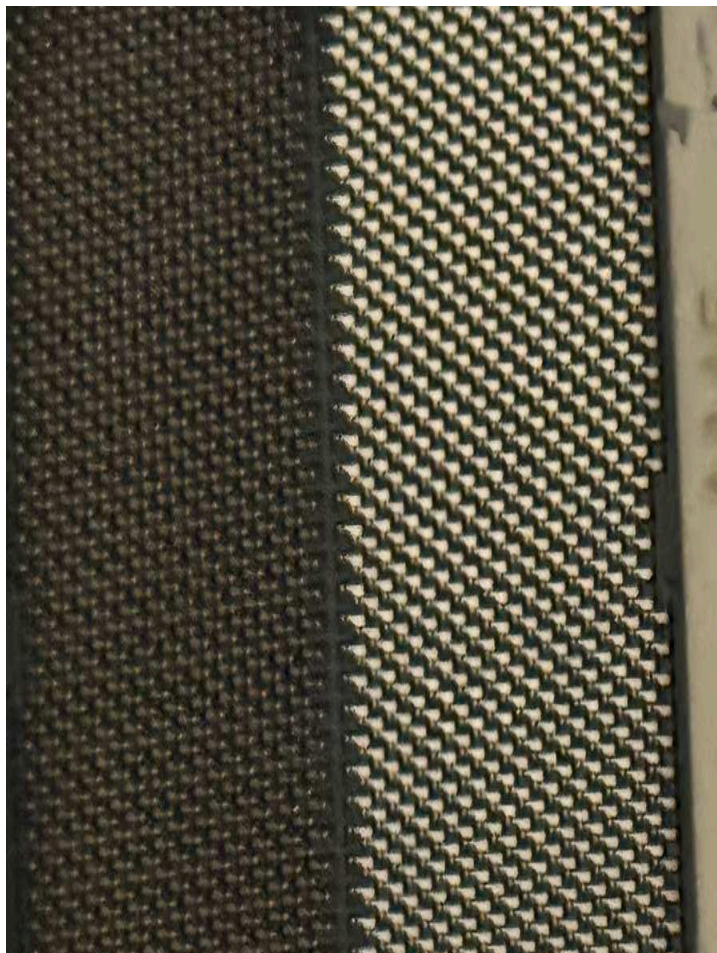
CPU contact pads re-photographed under different lighting to rule out damage obscured by glare or angle — confirmed clean.
